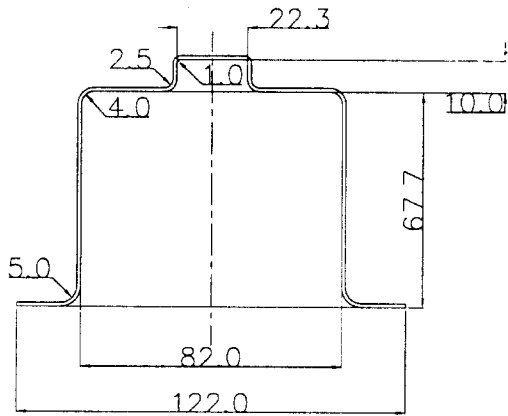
Input drawing file of the "Motor Housing" for "Pro\_Deep"
